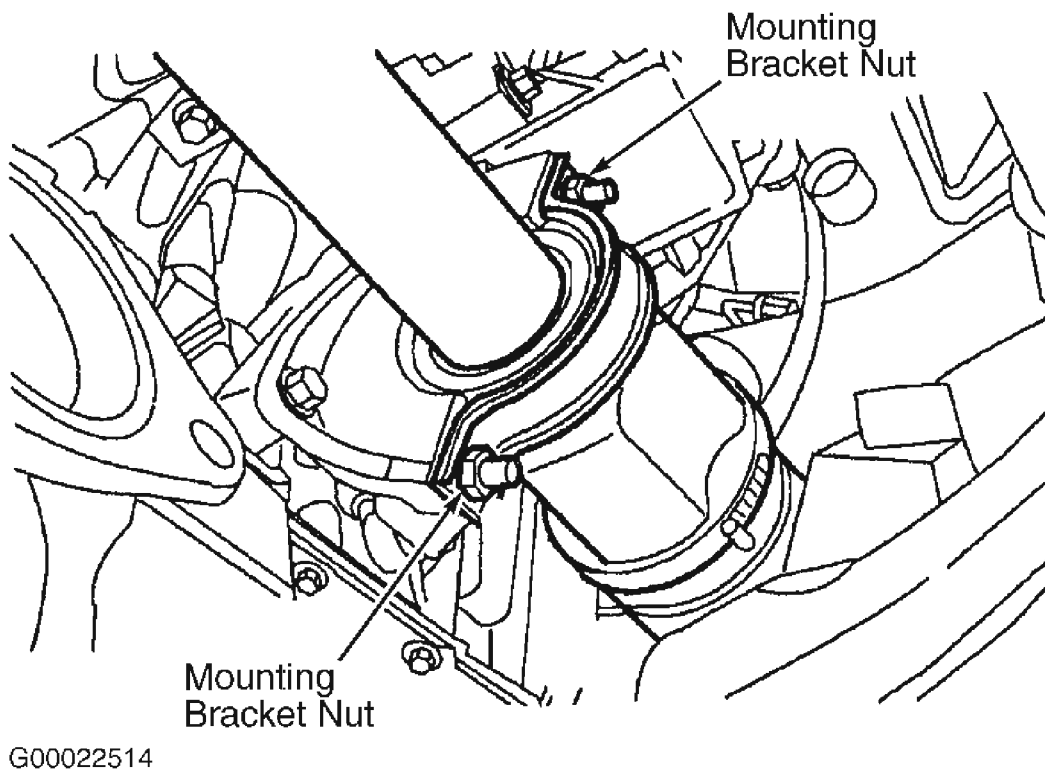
Removing Right Side Intermediate Bearing Bracket
